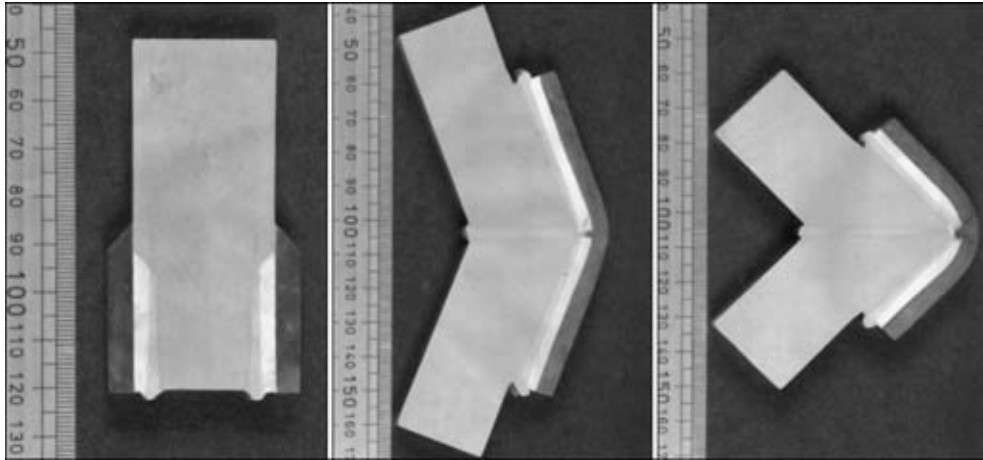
Macrosections of transition pieces manufactured according to new technology using electron beam welding
